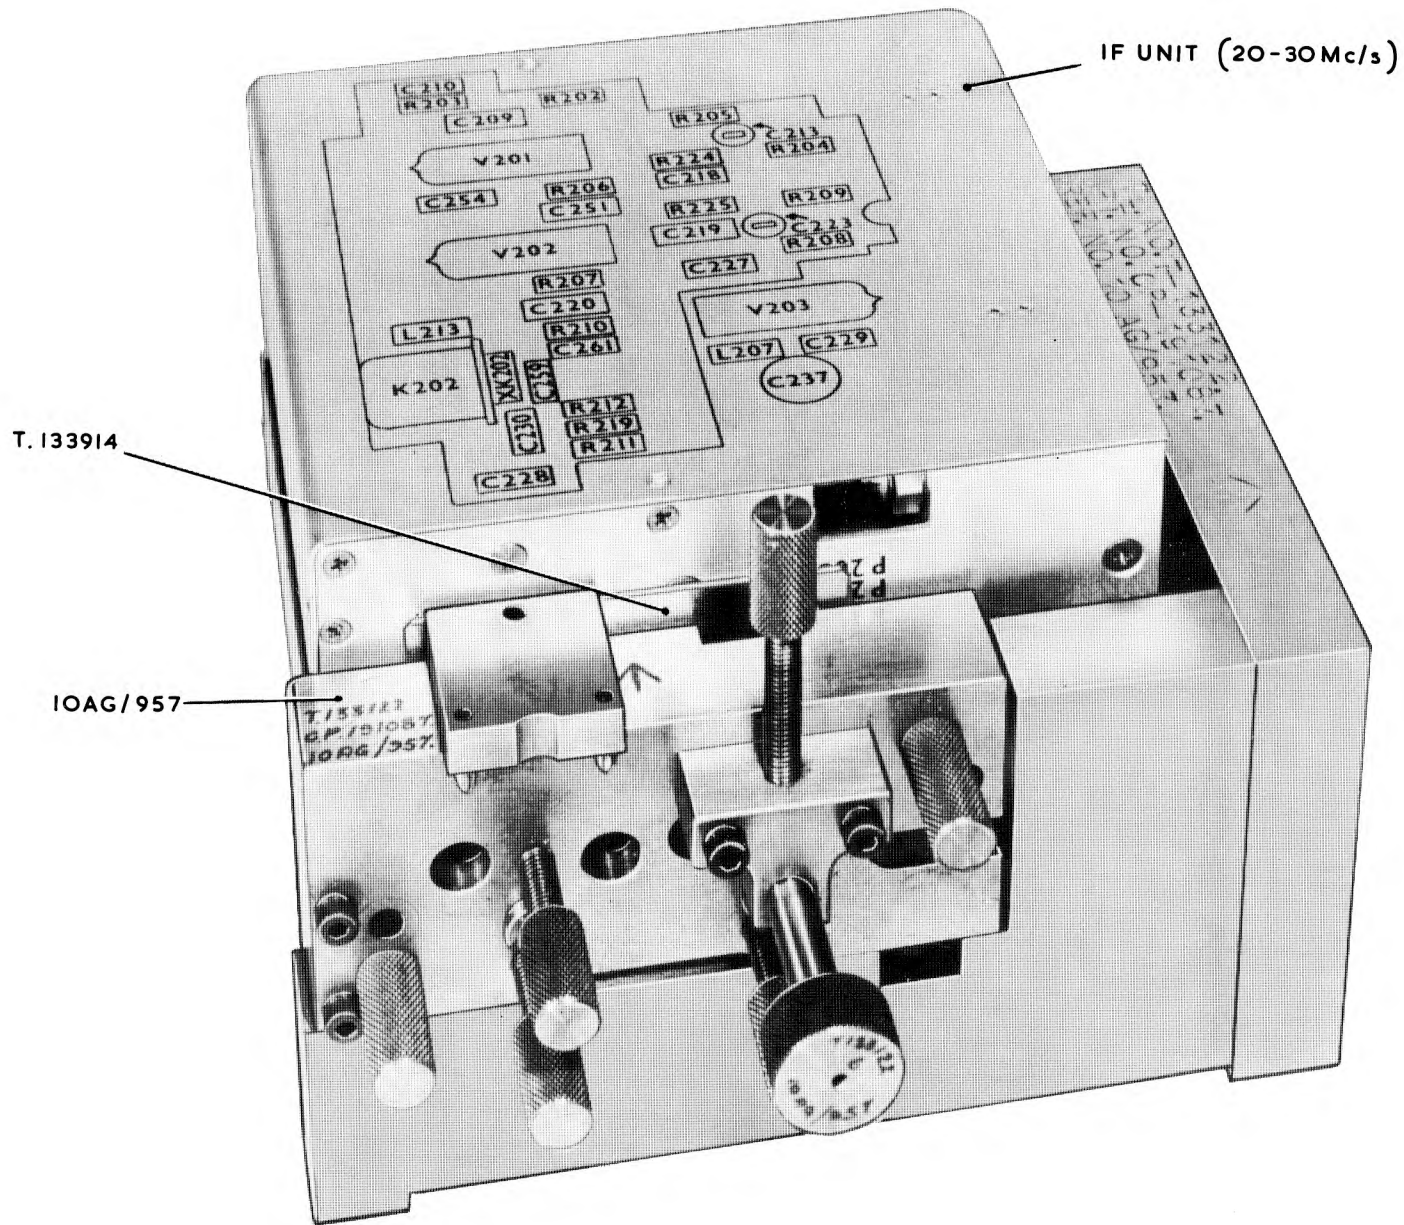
Drill and ream jig with IF unit (20 - 30Mc/s) in position
